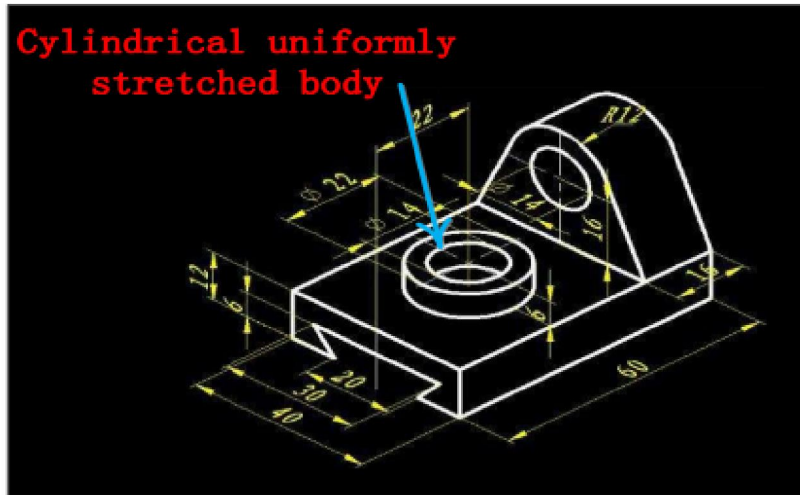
Example of uniformly extruded body features on a cylindrical surface.
